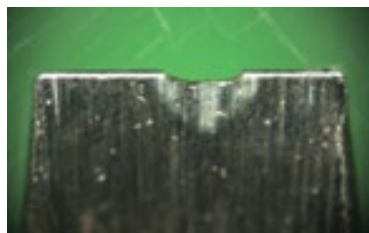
The view of a cutter blade after 5,000 cuts on a 16 mil Cu wire.
